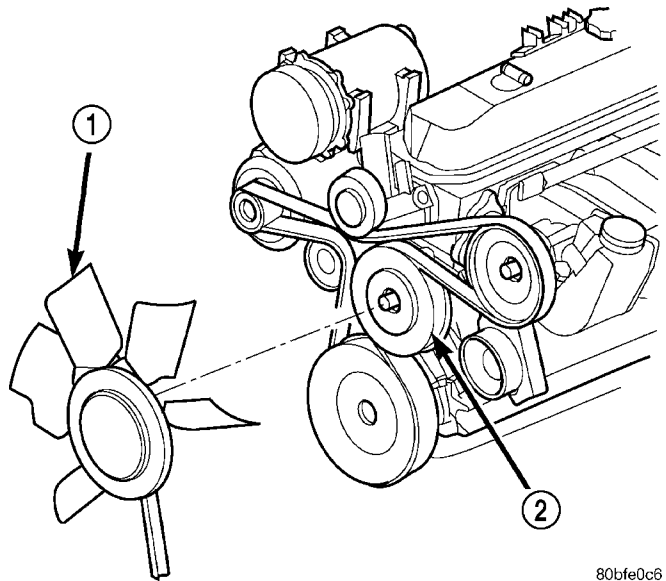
Water Pump Mounted Fan Drive - 4.0L Engine
